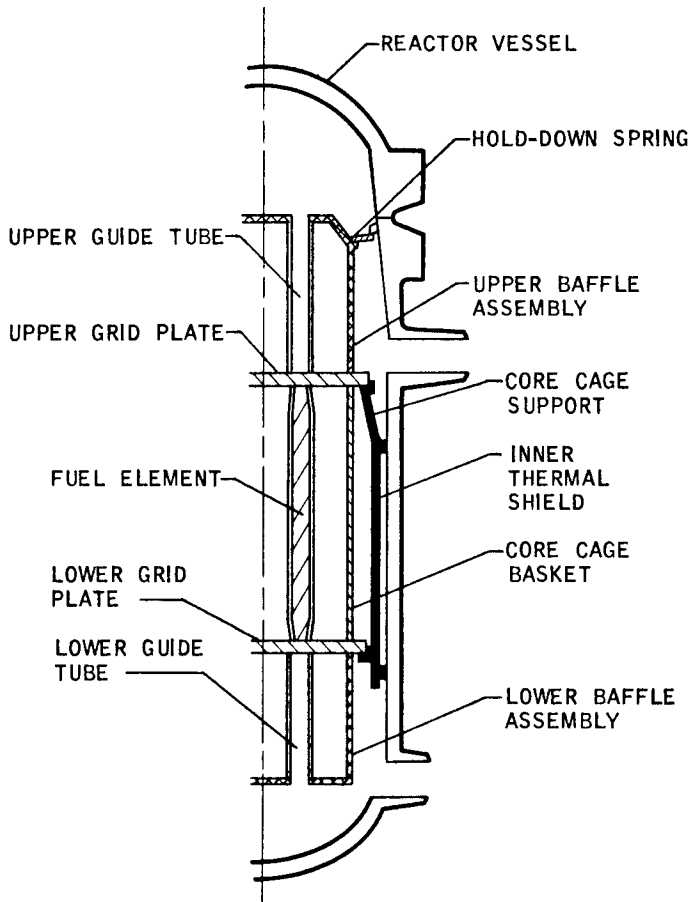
Core Cage Structure, Supports, and Guide Tubes
